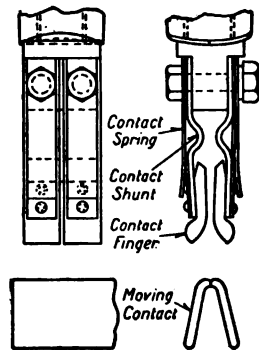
DETAILS OF THE TYPE F-11 CONTACTS USED ON THE 400-AMPERE, 2500-VOLT BREAKER
